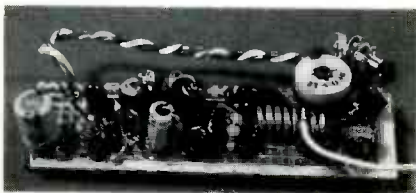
PROTOTYPE TRANSMITTER built on a small piece of board. Any construction technique may be used.
